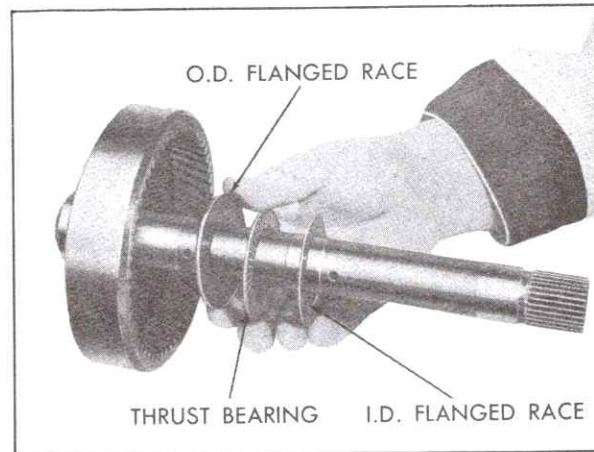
Installing Races and Thrust Bearing on Inner Face of Rear Internal Gear
